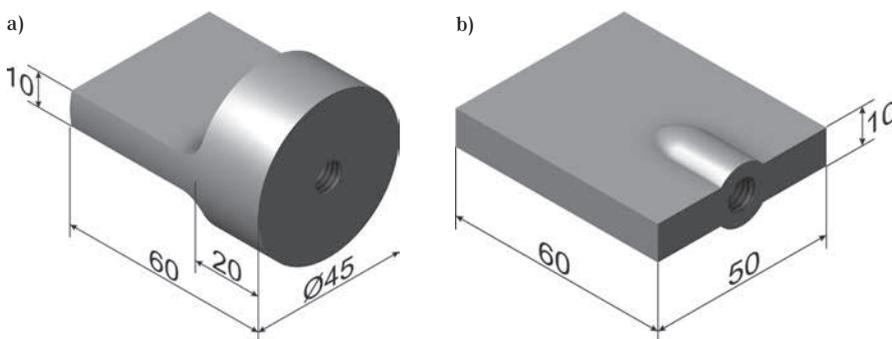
Geometry of specimens, a) bulk material, b) flat profile
